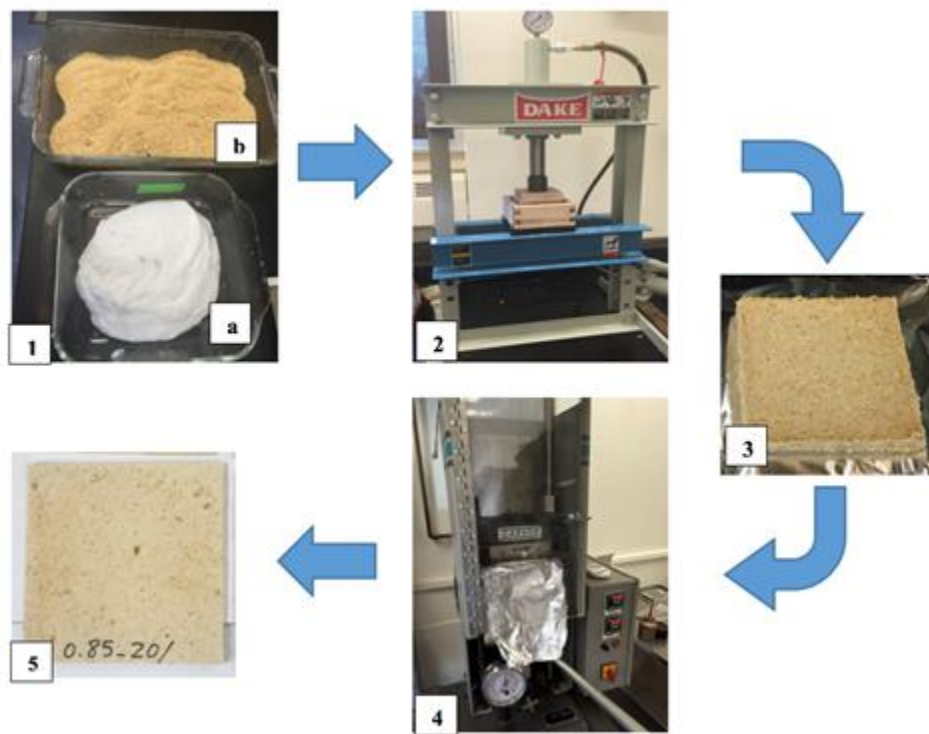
PB panel production procedure: (1) raw materials: (a) 3 wt.% CNF slurry and (b) southern pine WP; (2) forming and cold pressing; (3) cold-pressed mat; (4) hot pressing; and (5) final panel
